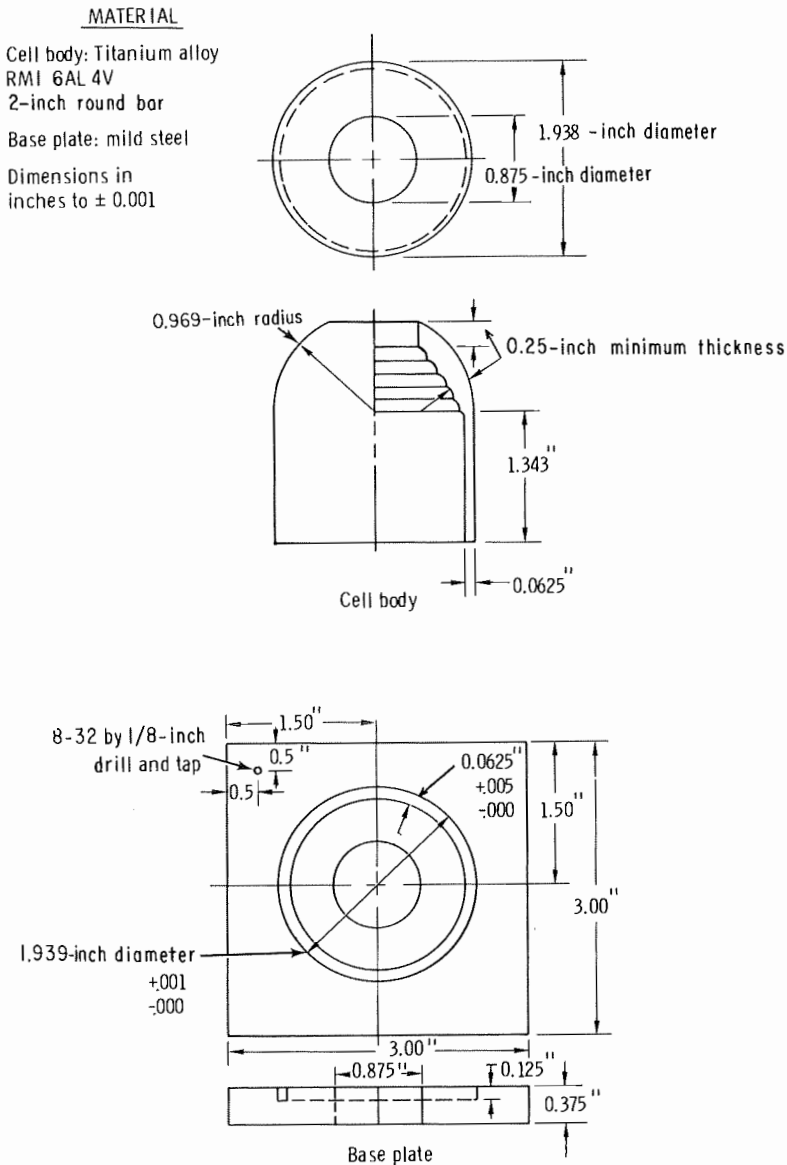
Mechanical design drawing of the rock-bolt load cell.
